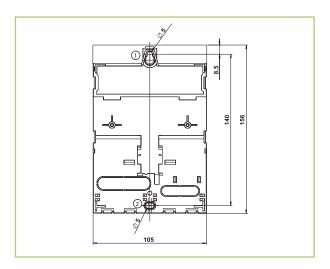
Rear of the controller with the mounting openings at the top \bigcirc and bottom \bigcirc
